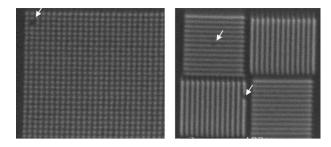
Typical defect examples that can be identified with the SEM review inspection.
